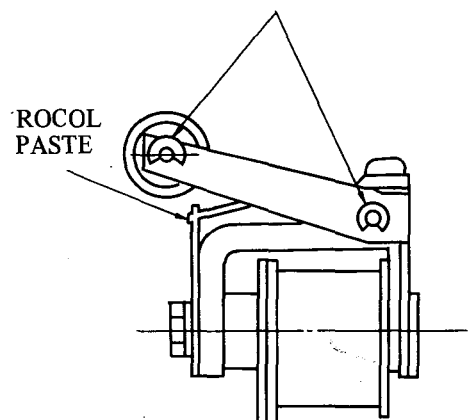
Parts to be Cleaned in Paper Tape Reader
